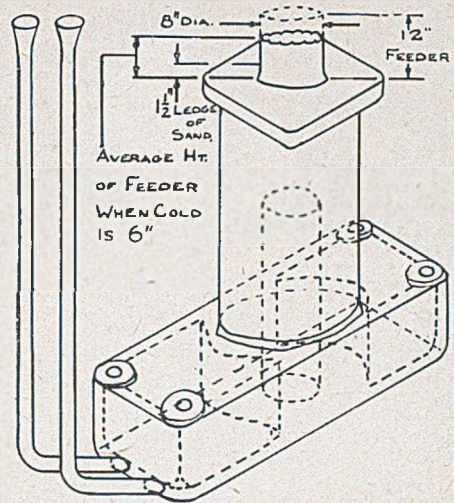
Exothermic Feeding Method applied to a Hydraulic Cylinder; and FIG. 12, the Casting with Feeder Head attached.
